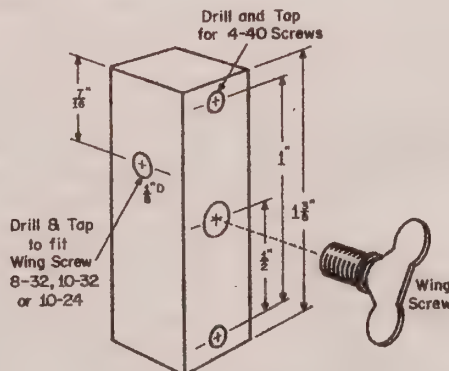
Details of the $\frac{1}{4}$ " \times $\frac{1}{4}$ " \times $1\frac{3}{8}$ " brass rod needed to mount the Lafayette 2.1 kc filter in the 75A-4.
